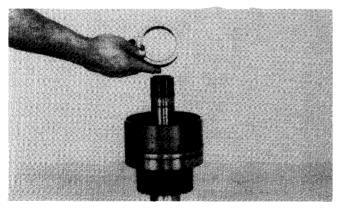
Remove return spring to piston spacer. Turn clutch over and tap clutch shaft on a block of wood to remove clutch piston.
